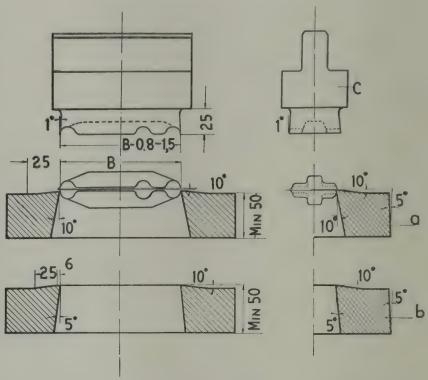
Design principles and standard dimensions of trimming tools for long forgings: (a) Trimmer blade for hot work; (b) Trimmer blade for cold work; and (c) Punch common for hot and cold work
